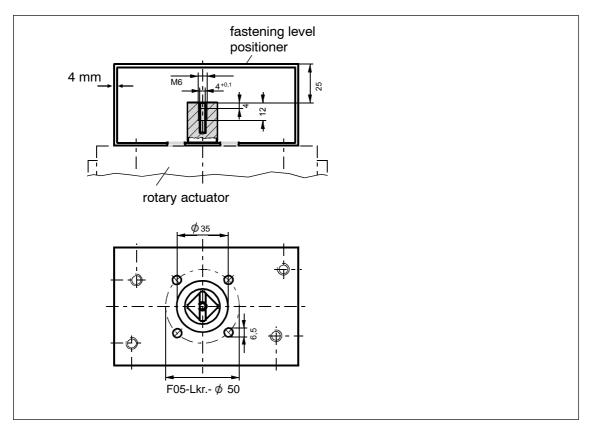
Attachment of rotary actuator, mounting console (scope of delivery actuator manufacturer), dimensions
